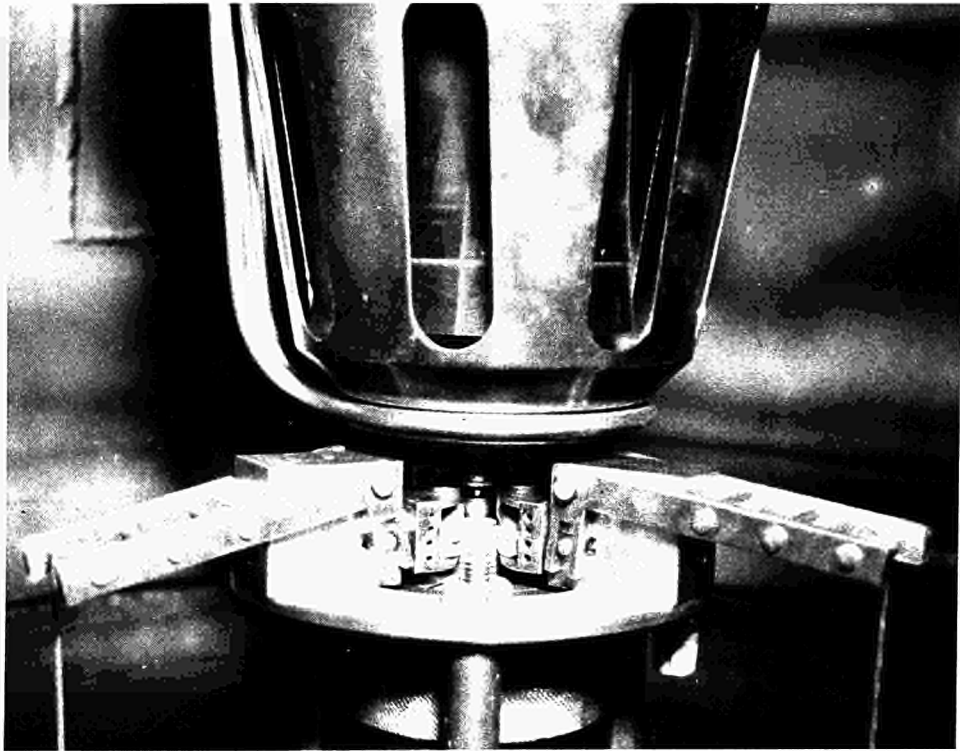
View of the equipment used to weld end-plug type b.
